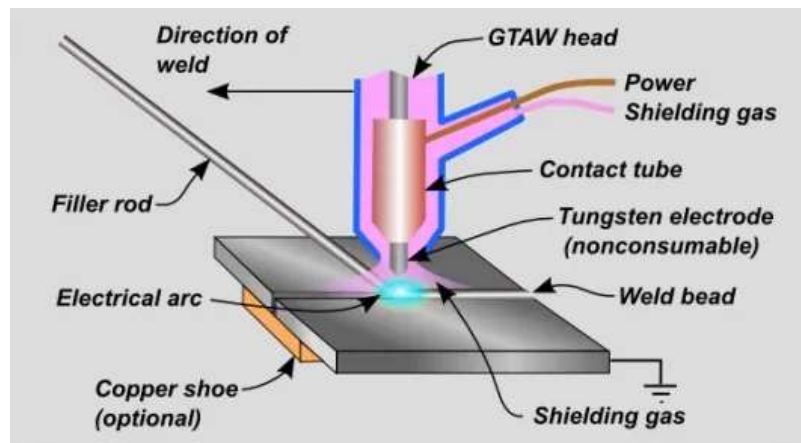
Gas Tungsten Arc Welding (Weldingis, 2021)
